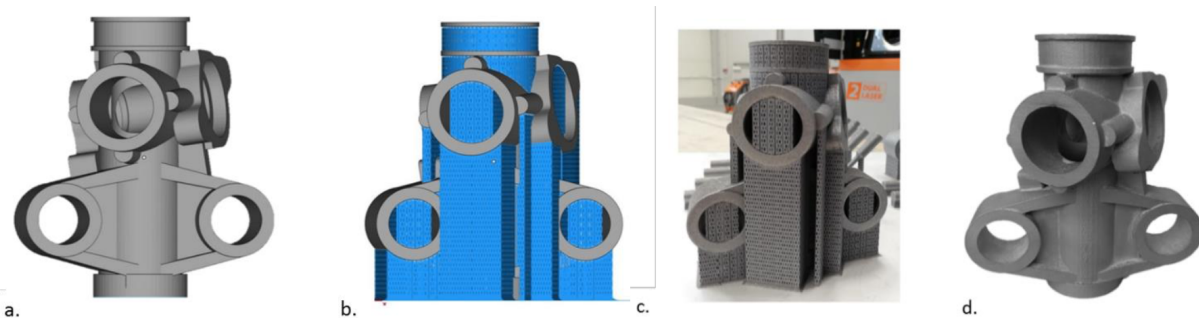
CAD model and SLM part of the automotive steering gear housing: a. CAD model of the gear housing; b. CAD model of the gear housing with added support structures; c. the gear housing with support structures fabricated using the SLM method; d. cleaned gear housing fabricated using the SLM method [19].
